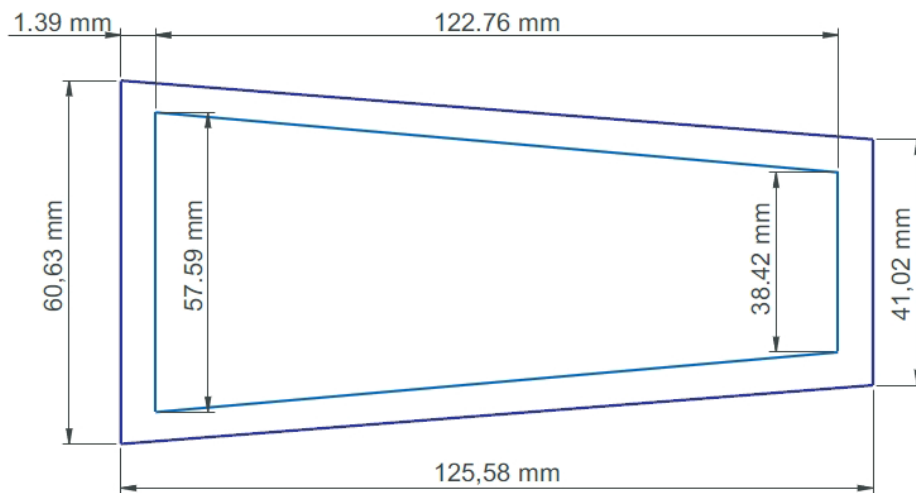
Geometrical dimensions of the trapezoidal sensors. [7]
